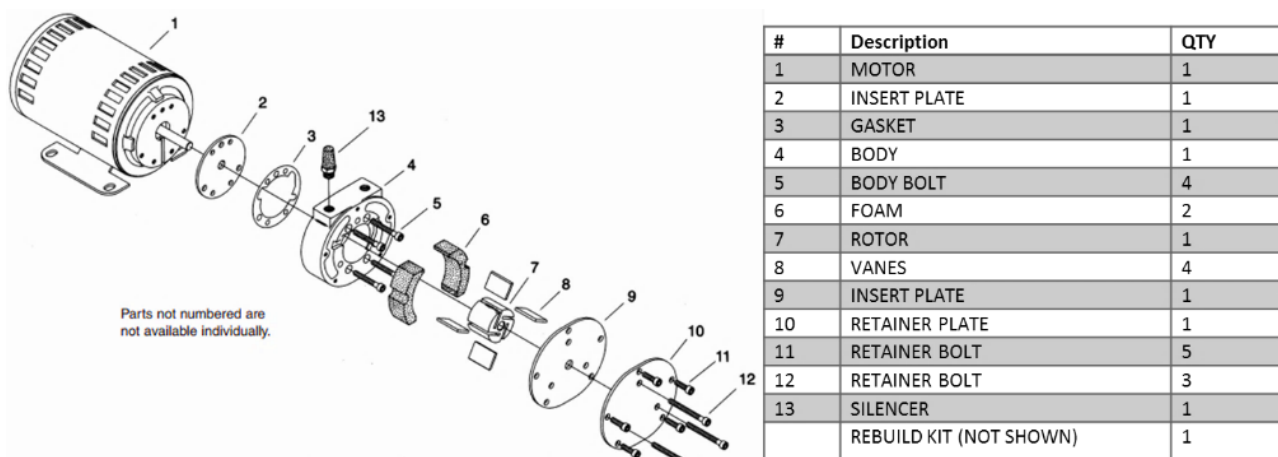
GAST Model 2032 Rotary Vane Pump Exploded View Diagram.
